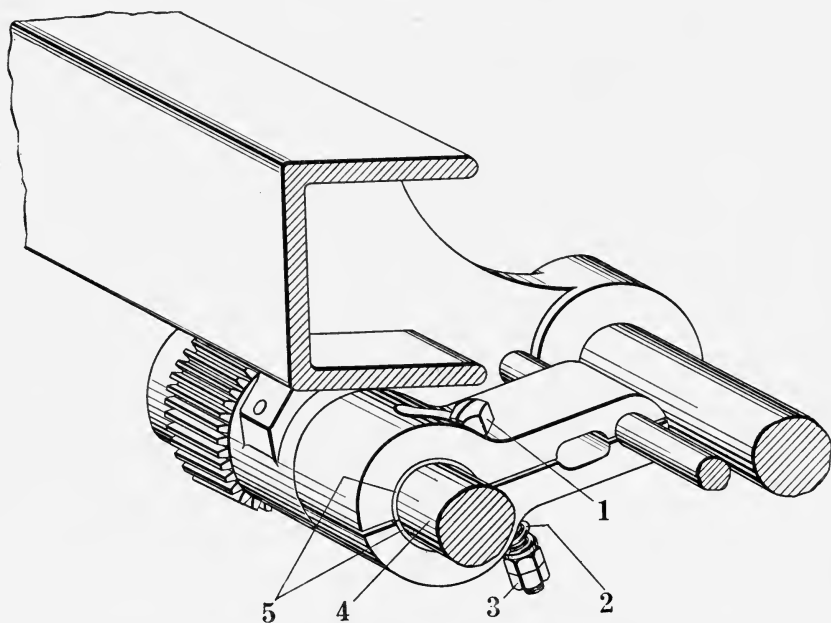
First Style Mold Driving Shaft Friction Clamp. The mold driving shaft is indicated at 4; the shaft is clamped by the leather linings 5 and 5 held within the upper and lower clamp plates under pressure of the spring 2. The screw 1 has on its lower end two nuts 3 which are adjusted to secure more or less tension on the spring 2 so that the leather clamp linings will grip the shaft 4 enough to steady the mold disk and prevent its overthrowing when coming to a stop.
